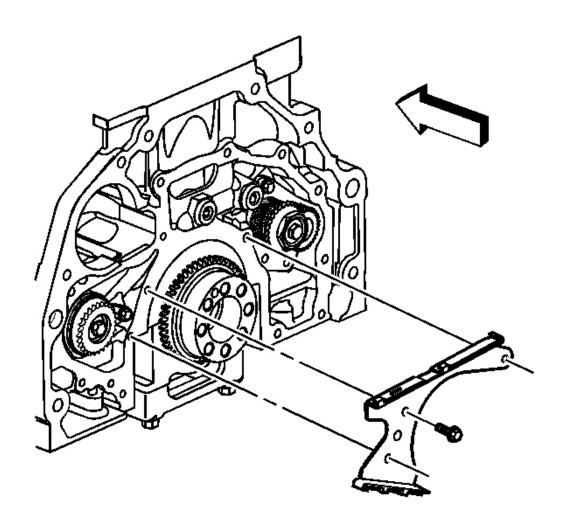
View Of Balance Shaft Chain Guide Courtesy of GENERAL MOTORS CORP.
